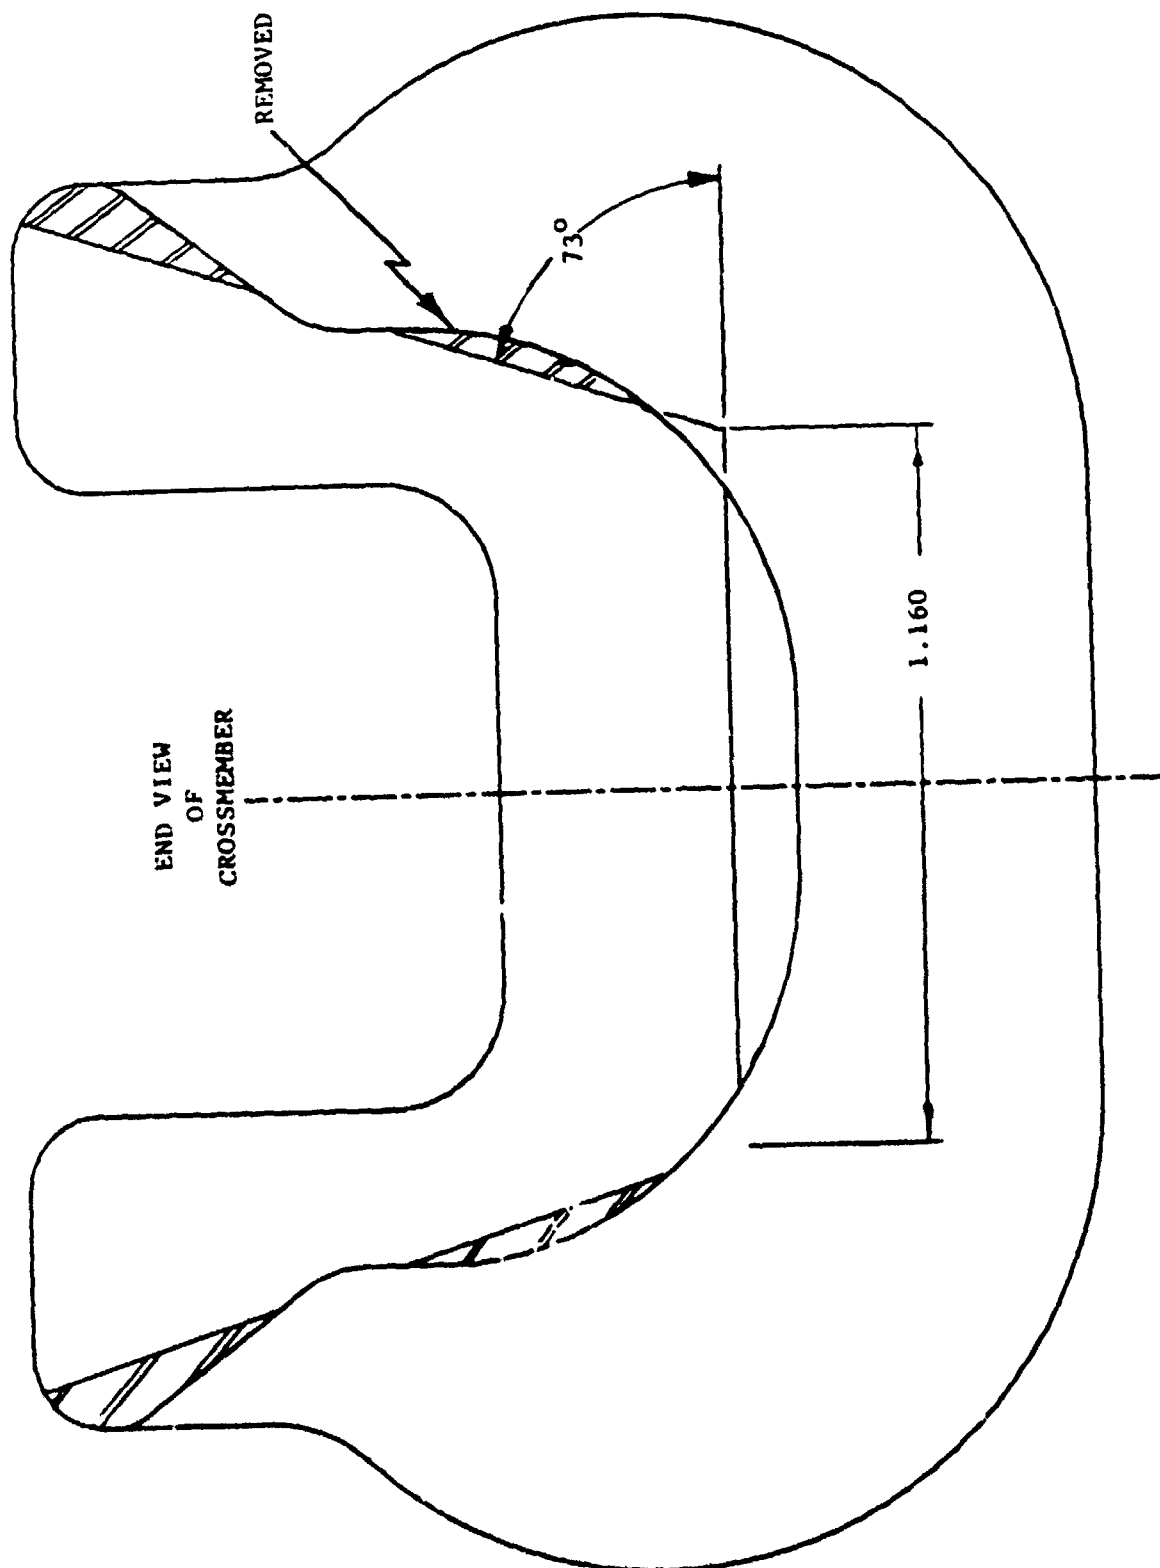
Material Which Was Removed From Crossmembers to Provide Clearance for Rubber Molded Block
